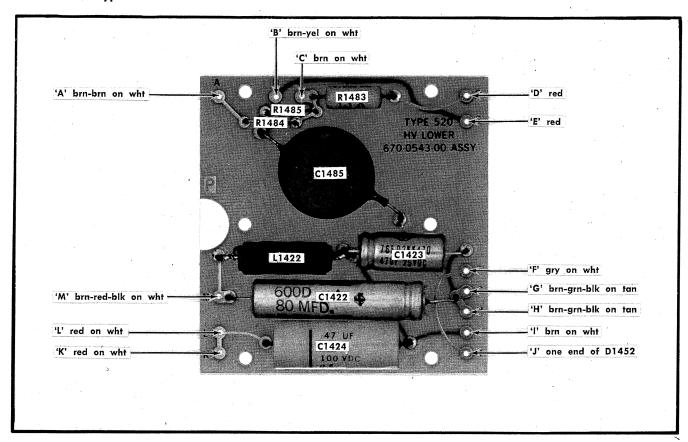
Lower High Voltage board; component identification and wire color codes.
